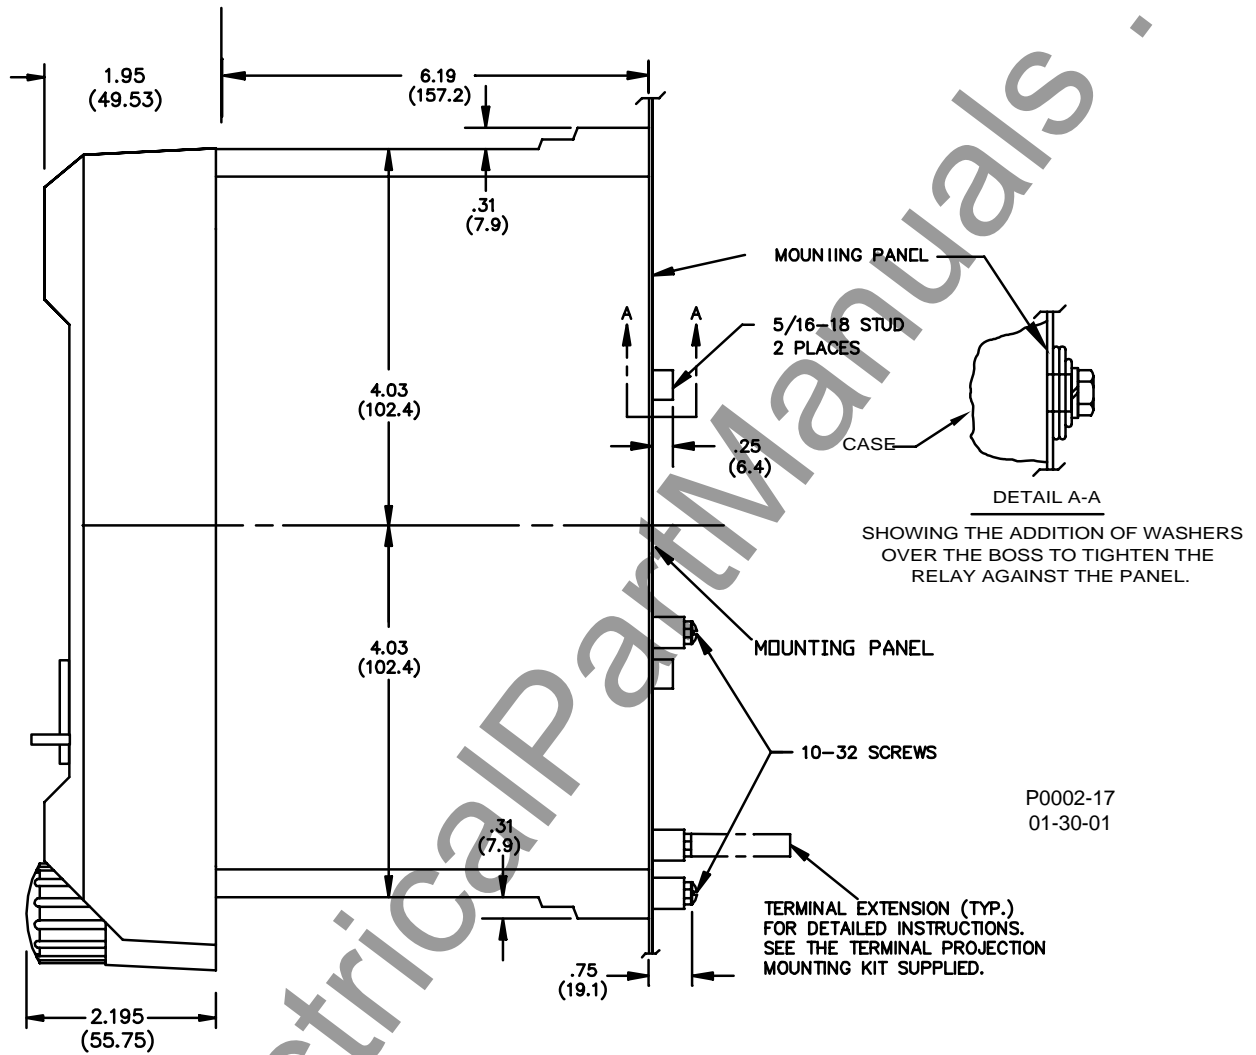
Case Dimensions, Side View, Single-Ended Projection-Mount Case
